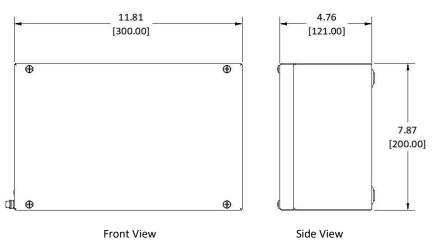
Stainless Steel Enclosure 2 (P/N 02-16911) inch [mm]
